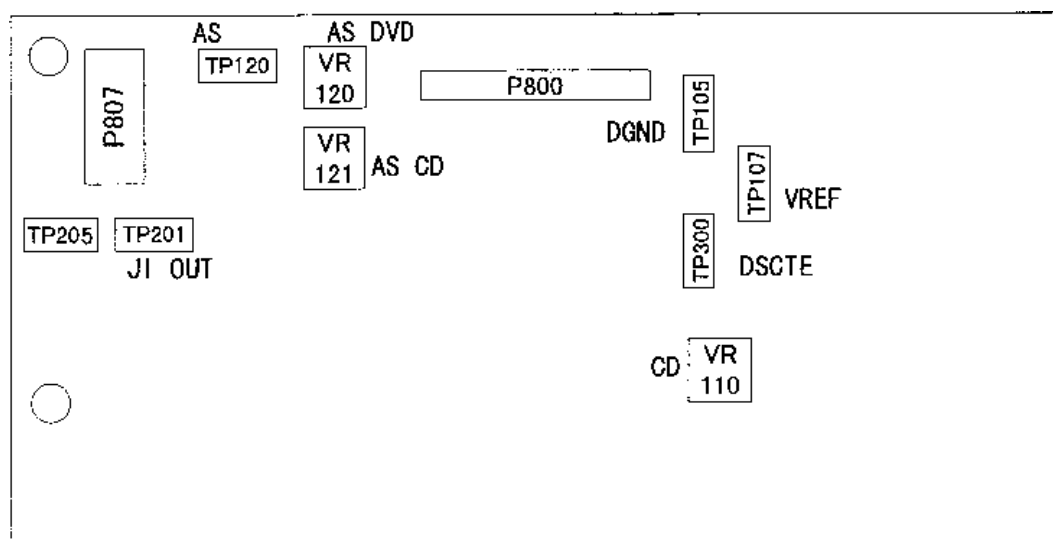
Parts Location for Electrical Adjustment (For DVD Player)
